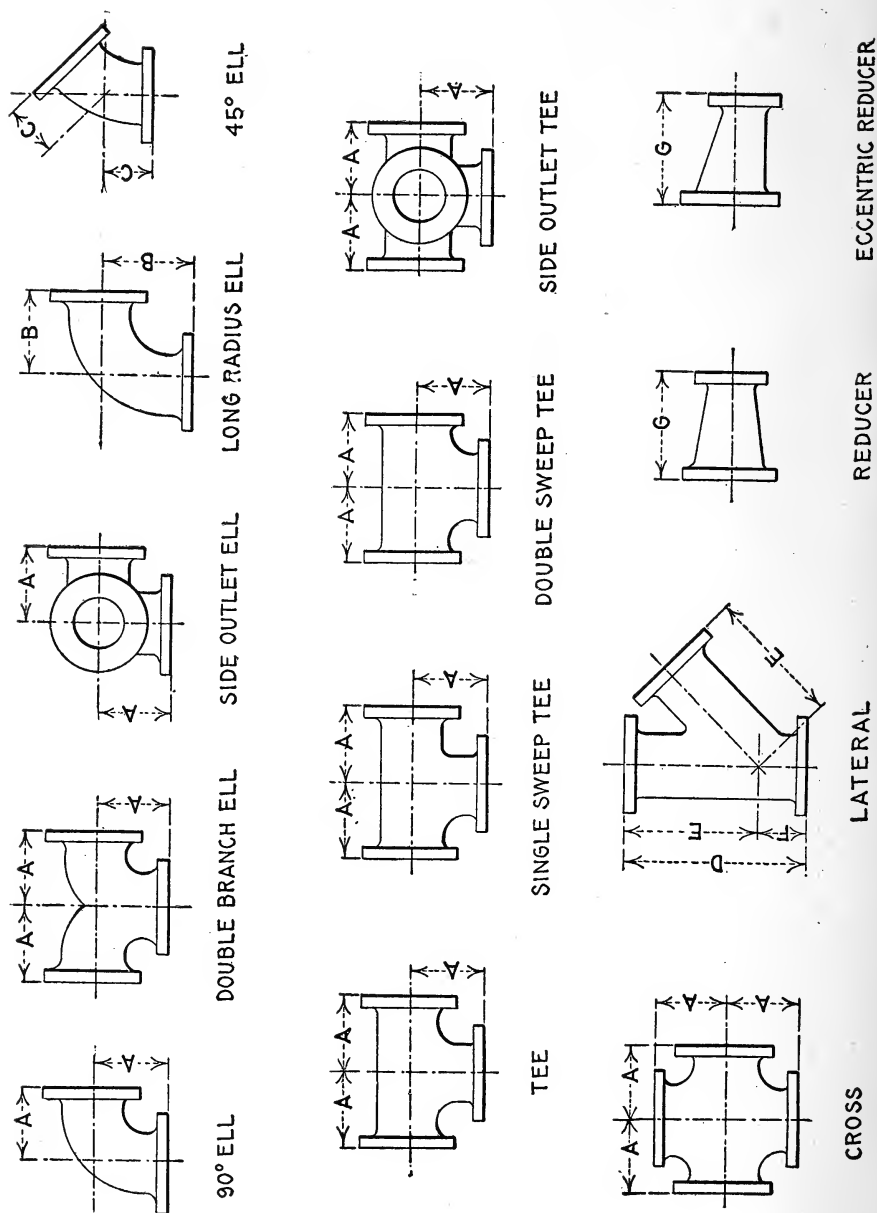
STANDARD TYPES OF FLANGE FITTINGS DIMENSIONED IN TABLES 15 AND 16
